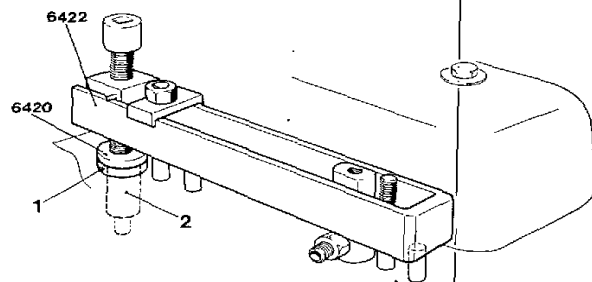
Fitting the copper sleeve and steel ring (70 series)
